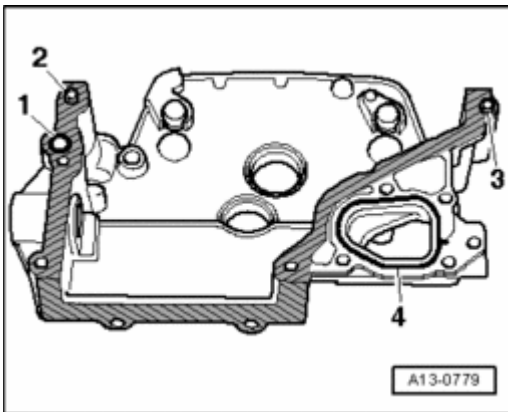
Checking Dowel Sleeves And Are Inserted In Upper Cover For Camshaft Timing Chain
